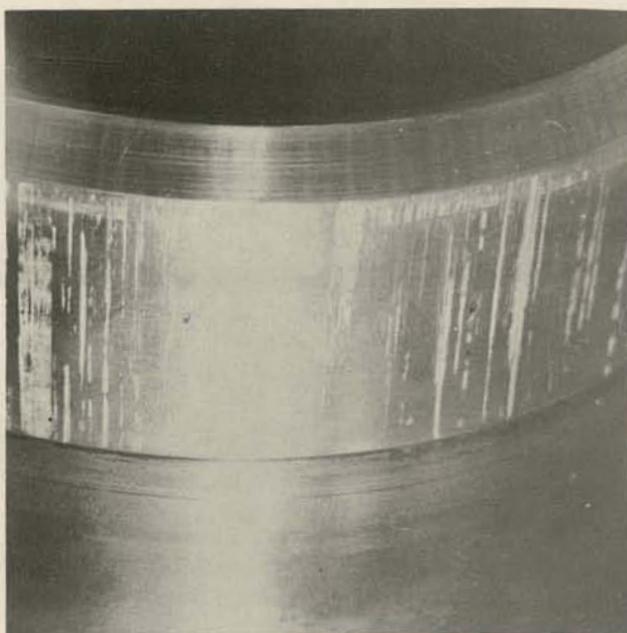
Test 6 - 17-4PH stainless steel nozzle (top) and 304 stainless steel sleeve (bottom) after galling test with no horizontal load. (NP Photo 18A-0-30, -31, -32)
